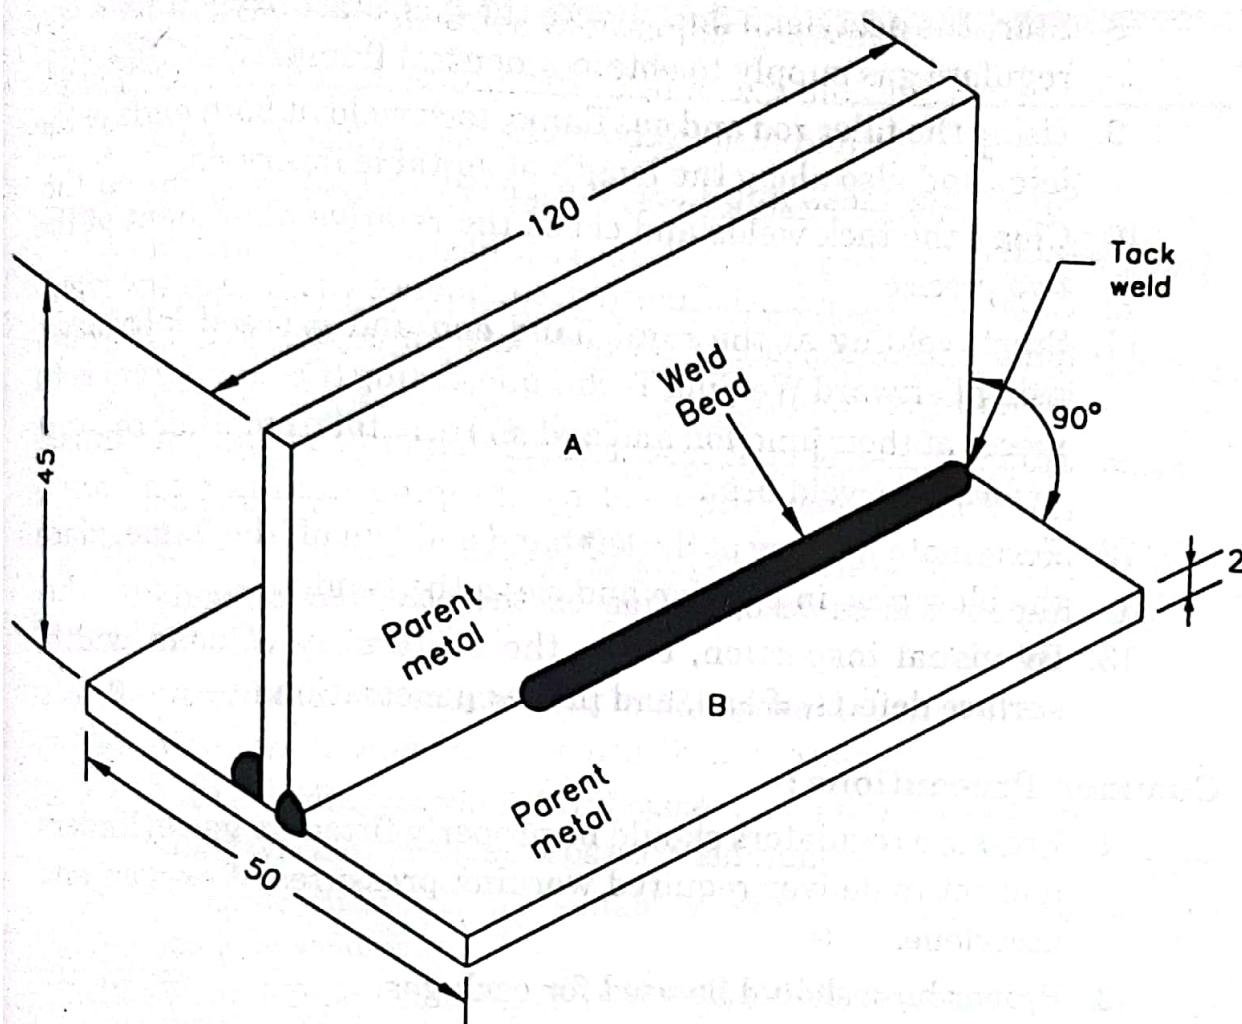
A T-Joint (Fillet Weld) in Gas Welding in Flat Position.
